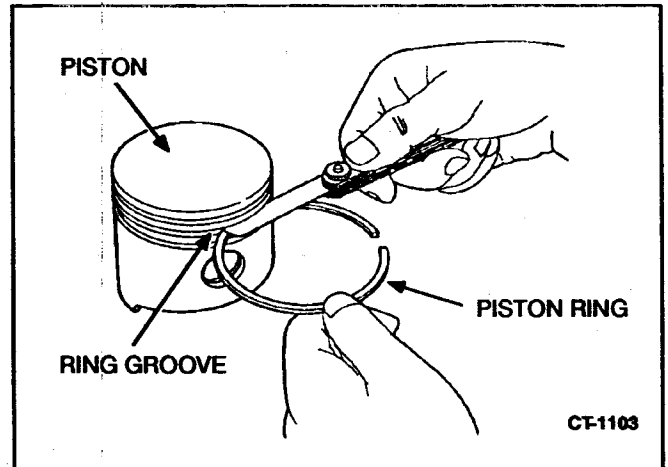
MEASURING RING GROOVE CLEARANCE
